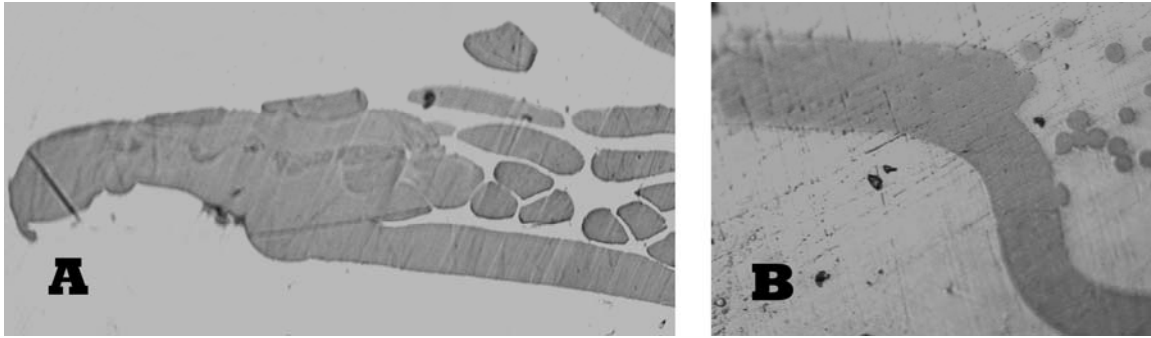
Cross-section of the A) weld joint of the knit and plate and B) weld joint of the non-woven and the plate.
